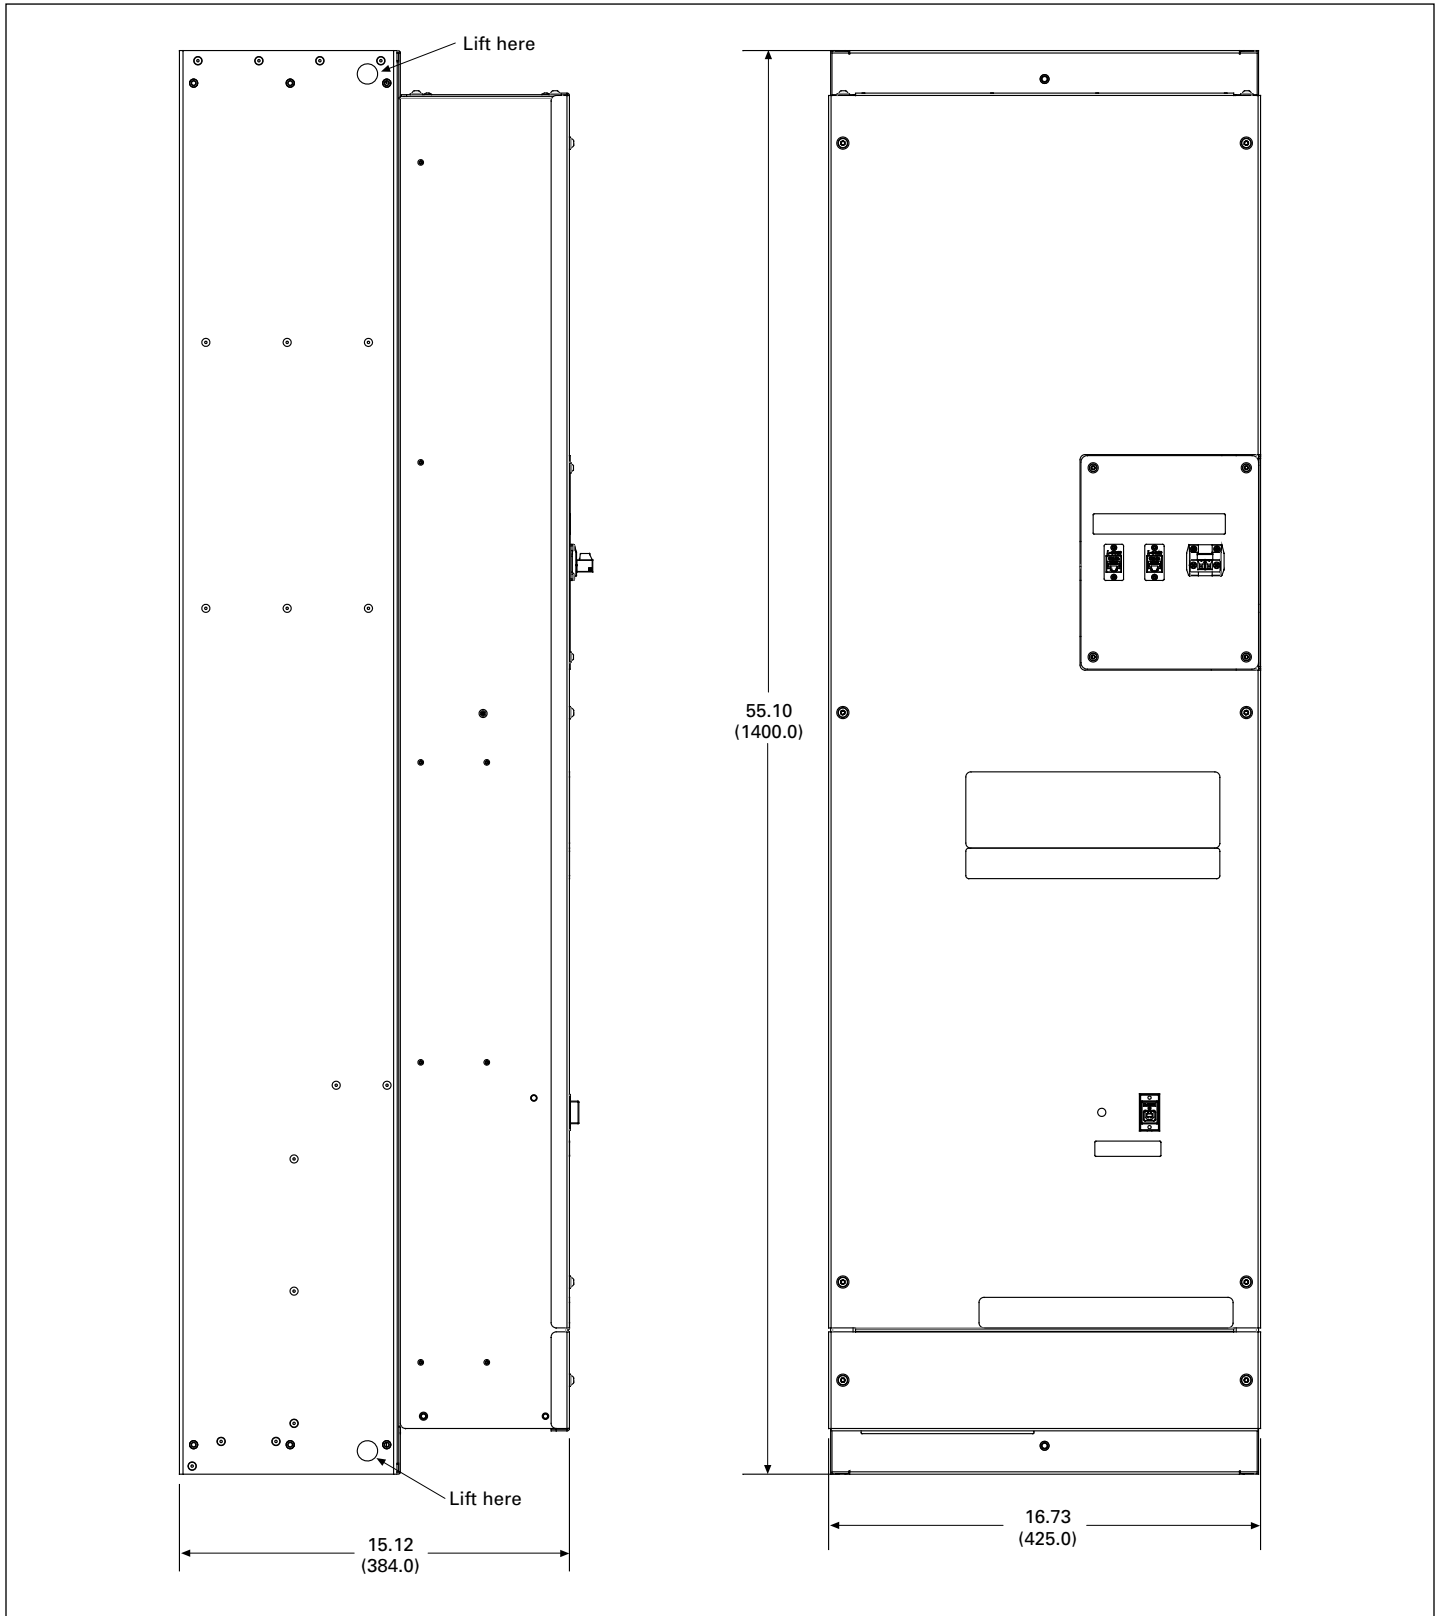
Chassis mount 120 A—dimensions in inches (mm)
